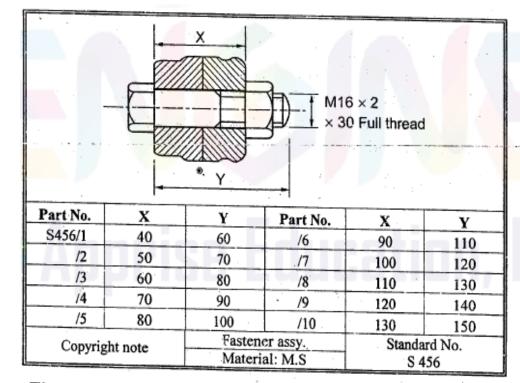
Typical collective assembly drawing of a nut with bolts of various lengths
